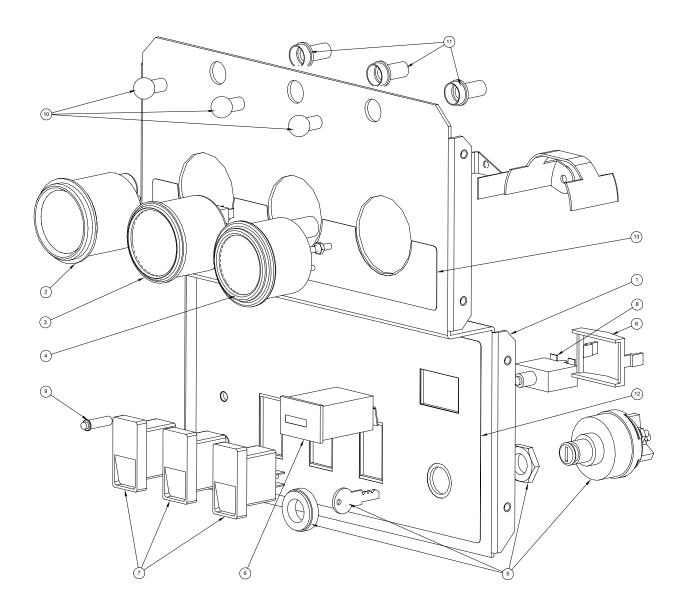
CDS 4.6 Dash Box Assembly D-6986 Rev-
